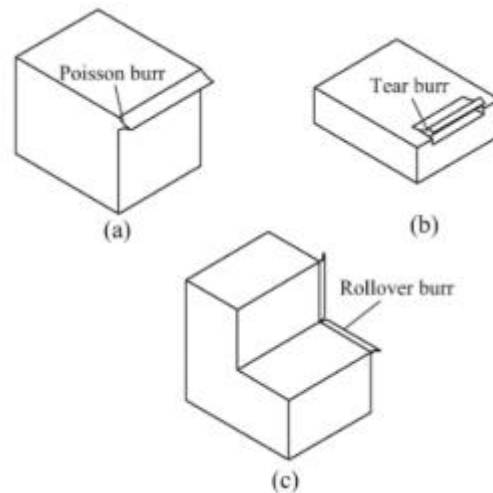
Schematics of poisson burr, tear burr and roll-over burr [22]
